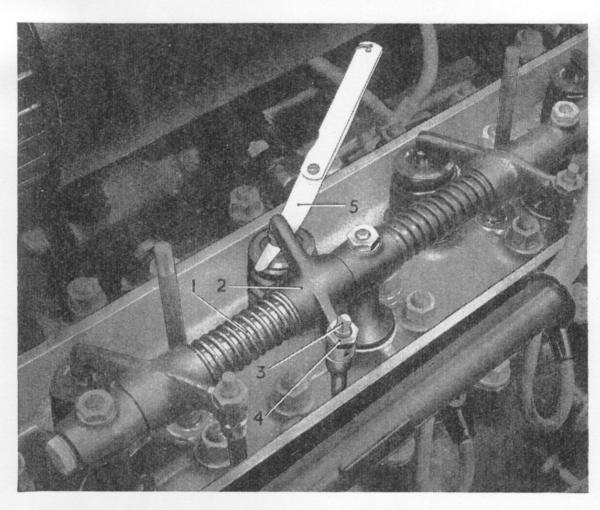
ADJUSTING THE INLET VALVE ROCKER CLEARANCES.
